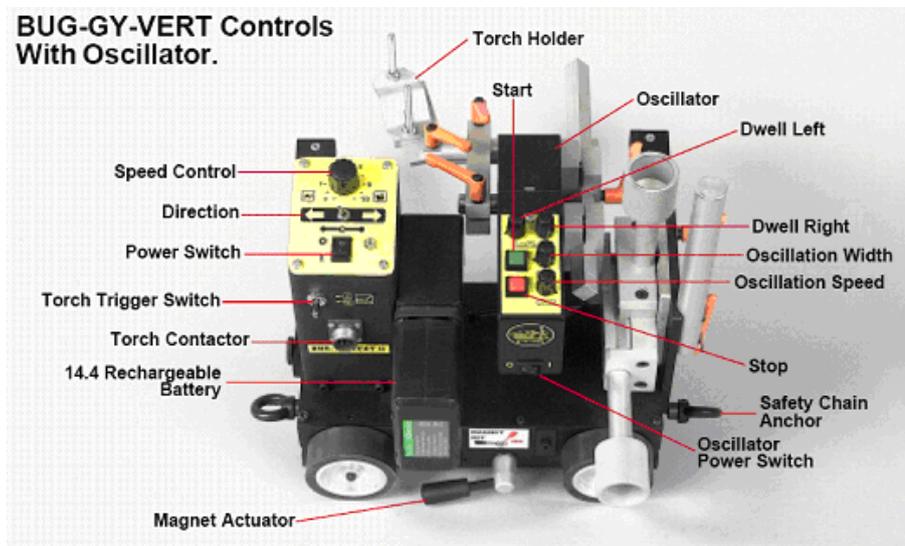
Battery powered, with modern magnetic actuator equipped with travel carriage for welding in vertical or horizontal position. (BUG-O)
